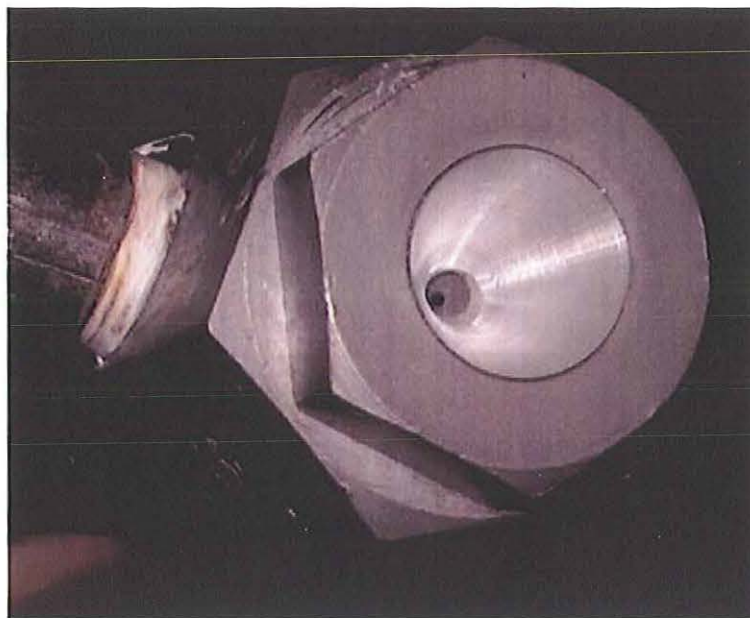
Initial nozzle assembly with gauging cone and air shroud
